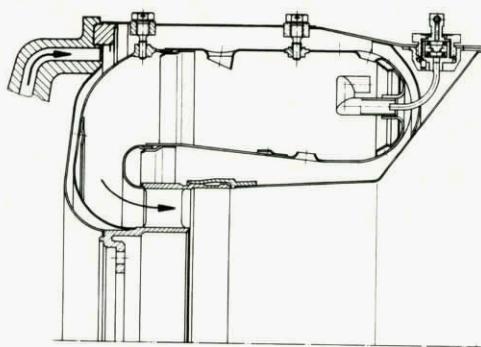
Combustion Chamber of KHD T112 Small Engine
